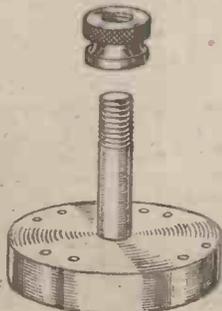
Drilling jig for the eight No. 76 wire holes shown in Fig. 3. The centre stud of the jig is pushed through the centre hole "B" and fixed with the knurled nut. The eight guide holes in the jig enable uniform drilling of the many small holes to be accomplished.
